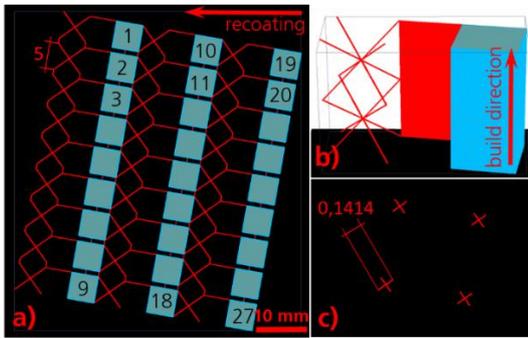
Specimens to determine the influence of process parameters. a) Arrangement of specimens within the build job. b) Geometry of the specimens used. c) In each layer, two crossed scan vectors form each cross-section of a strut.
